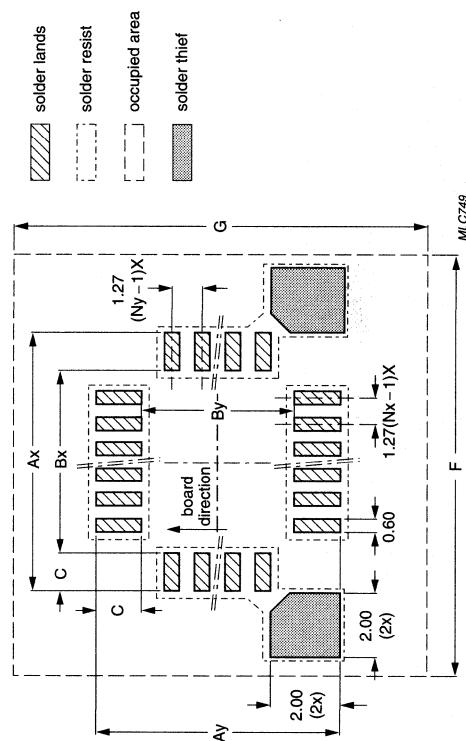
PC board footprint for mounting PLCC packages (wave soldering).
